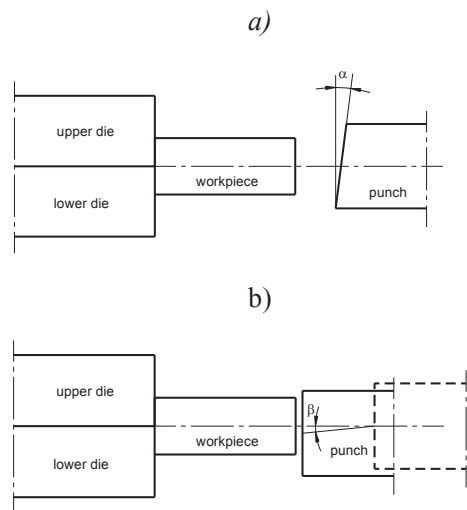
Schema of the workpiece buckling imposing by: a) inclination of the tool working surface at angle α , b) non axial tool movement.
